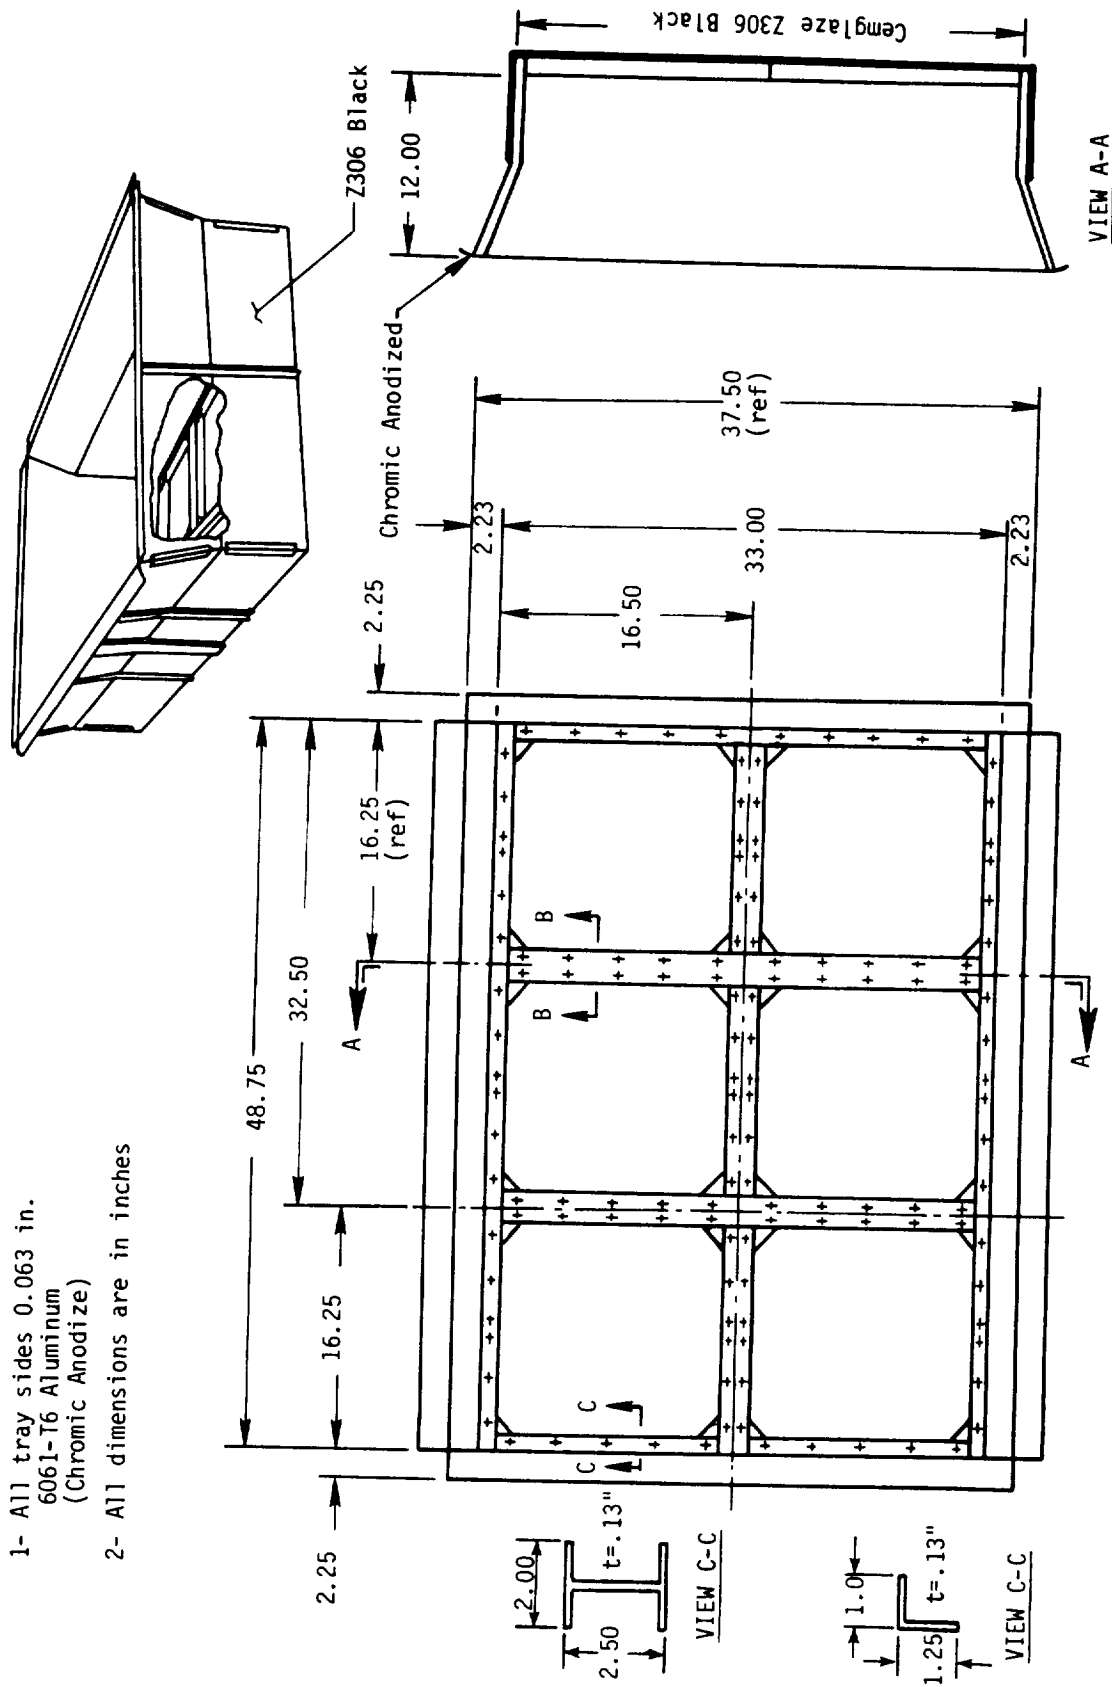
LDEF Peripheral Tray Assembly - 12 Inch Tray
